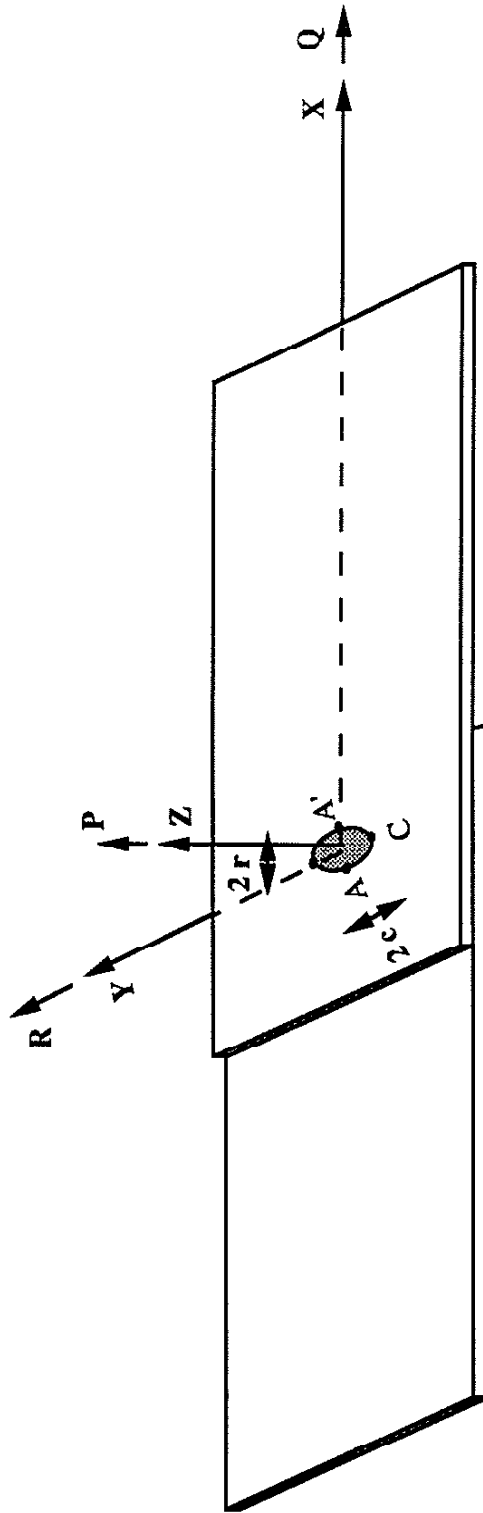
Coordinate system and main loading directions for a tensile-shear specimen with an elliptical weld nugget
